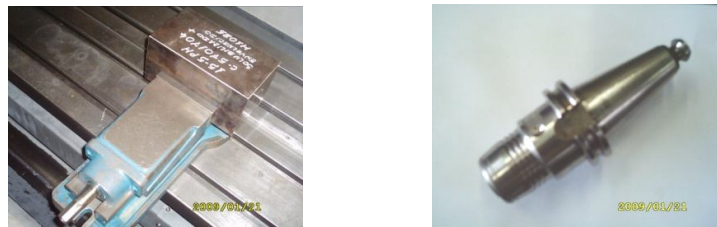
(a) Material sample fixture. (b) Hydraulic fixture for the tool.
